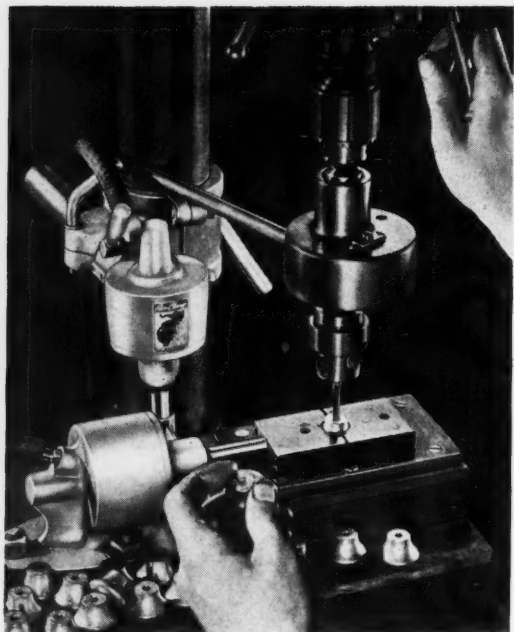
The Vertical Air-Clamp Holds the Horizontal One, Which in Turn Operates the Movable Half of a Split Clamping Device
